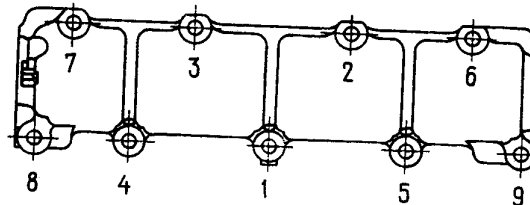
Sequence of Tightening Camshaft Bearing Housing Nuts
